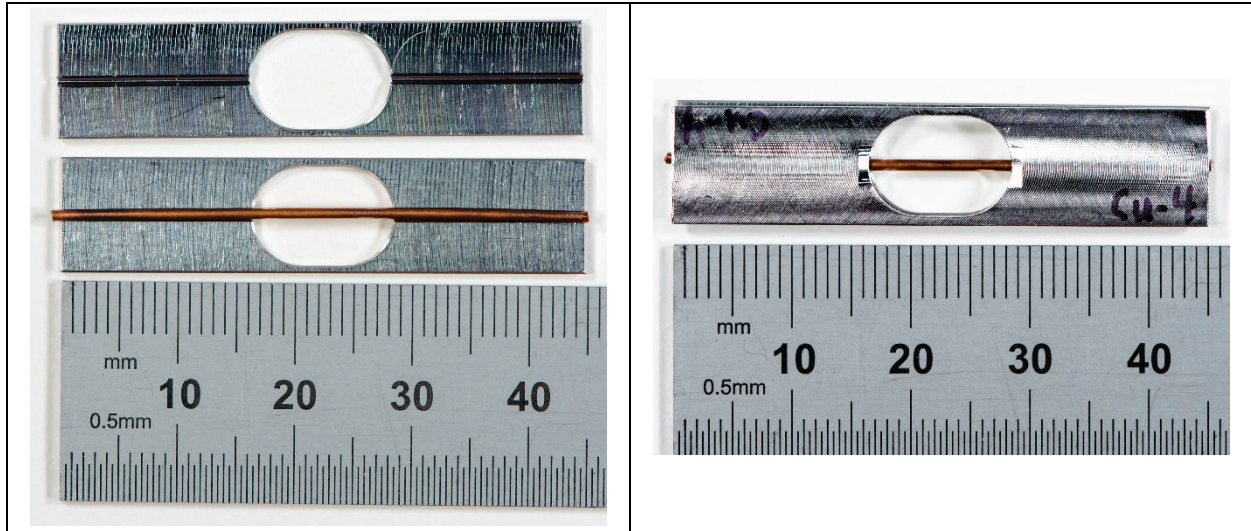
Photos of the final tab design with a Cu specimen before and after clamping the two halves together.
